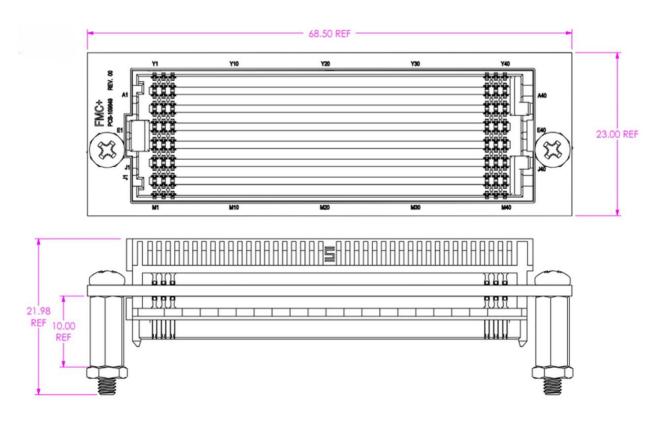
Mechanical Dimensions for FMC+ Extender Card (in millimeters)
